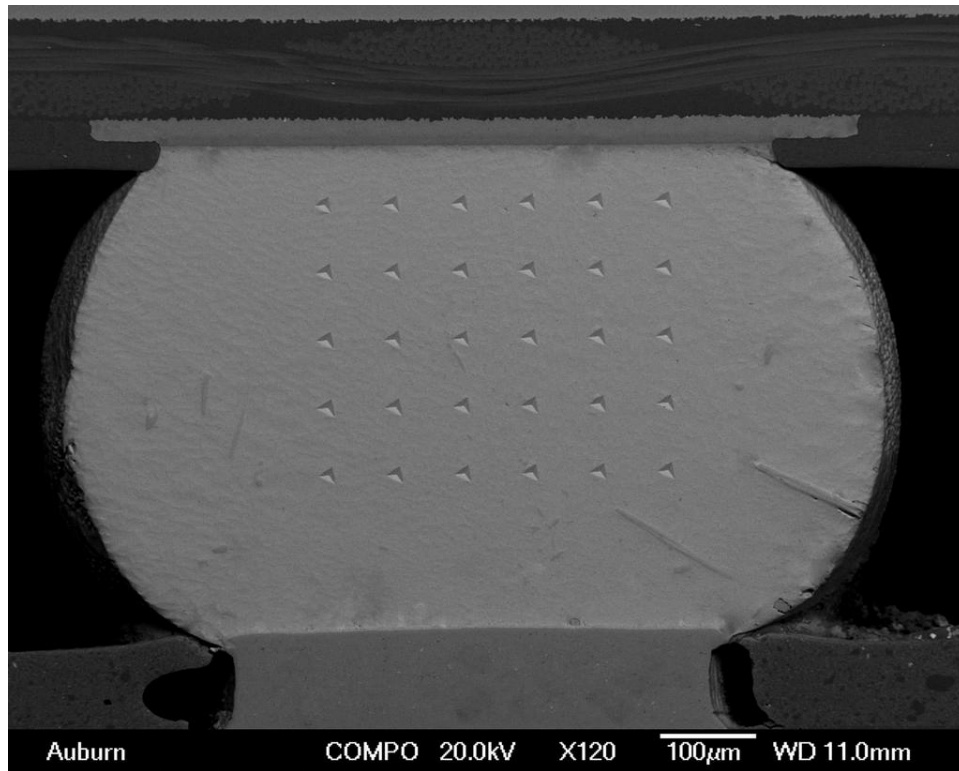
SAC305 Solder Joint after Nanoindentation Testing
